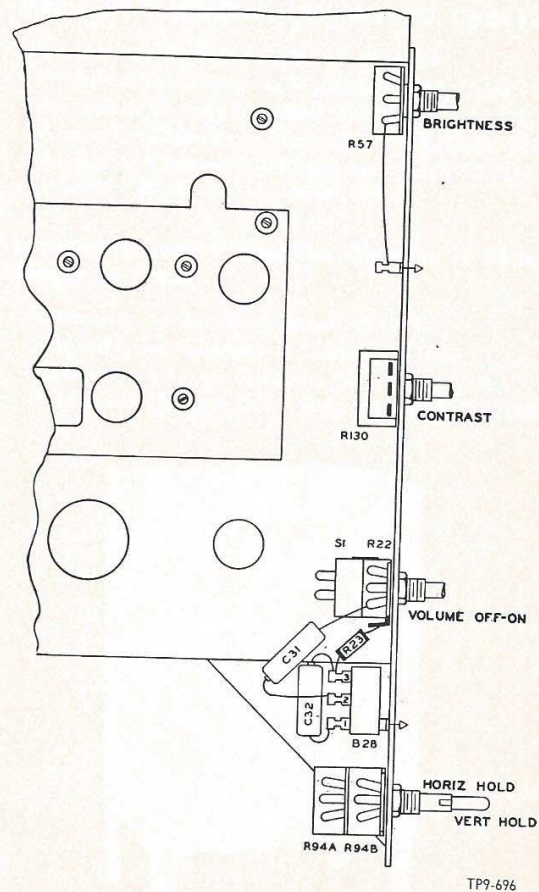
Partial Top View of Model 50-T1630, Showing Components Located on Control Panel
